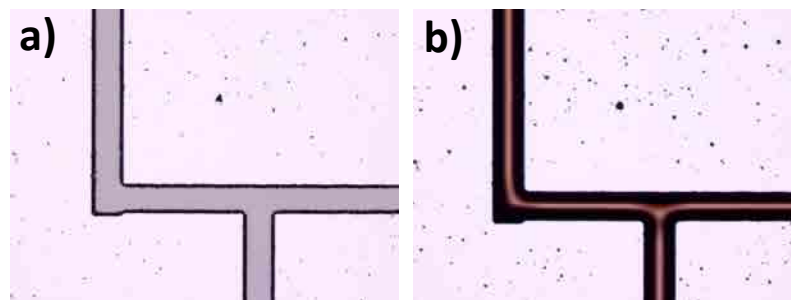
The part of flow layer mold a) before and b) after thermal treatment, clearly indicating channel cross-section.
